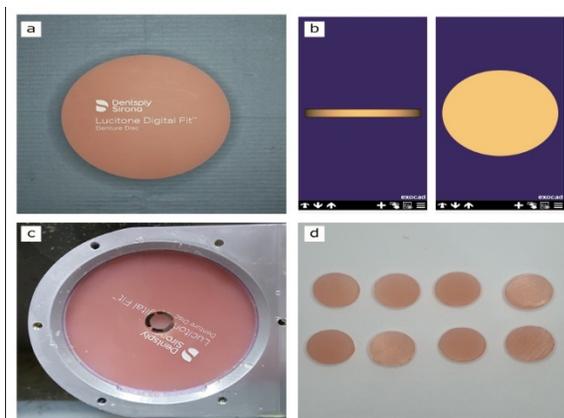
Specimen preparation. a CAD/CAM PMMA blank; b Specimen design; c Specimen milling; d Finished specimens.
